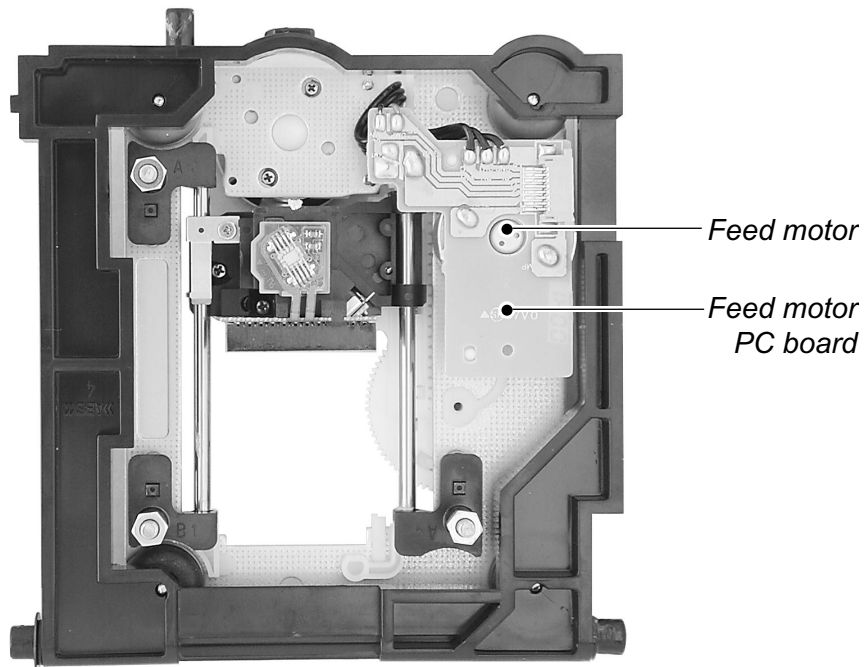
Pickup mechanism chassis assembly (Bottom side)
